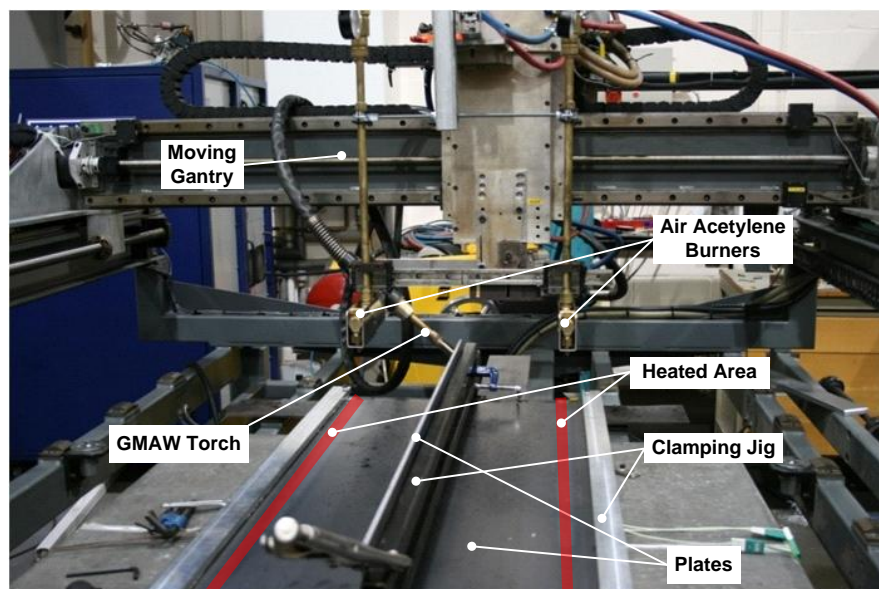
TTH experimental setup using air-acetylene burners installed on a large gantry
